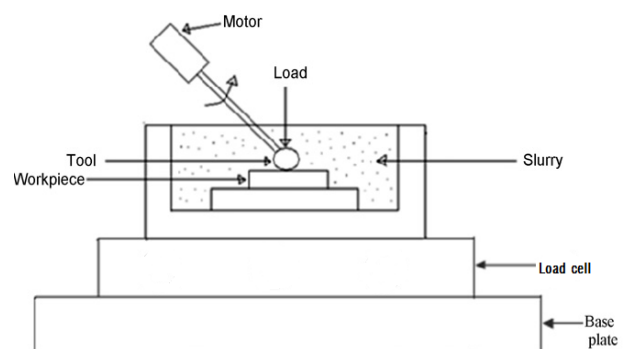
HDP Mechanism (Hung Tu-Chieh *et al*, 2011)
